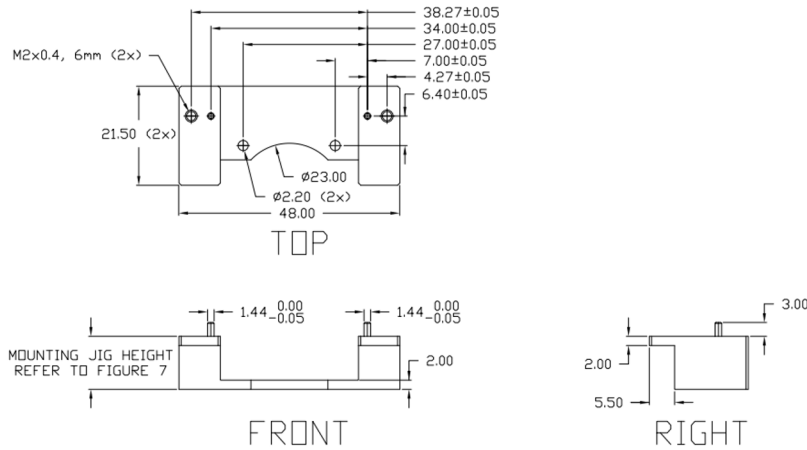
Recommended Mounting Concept with Alignment Jig
